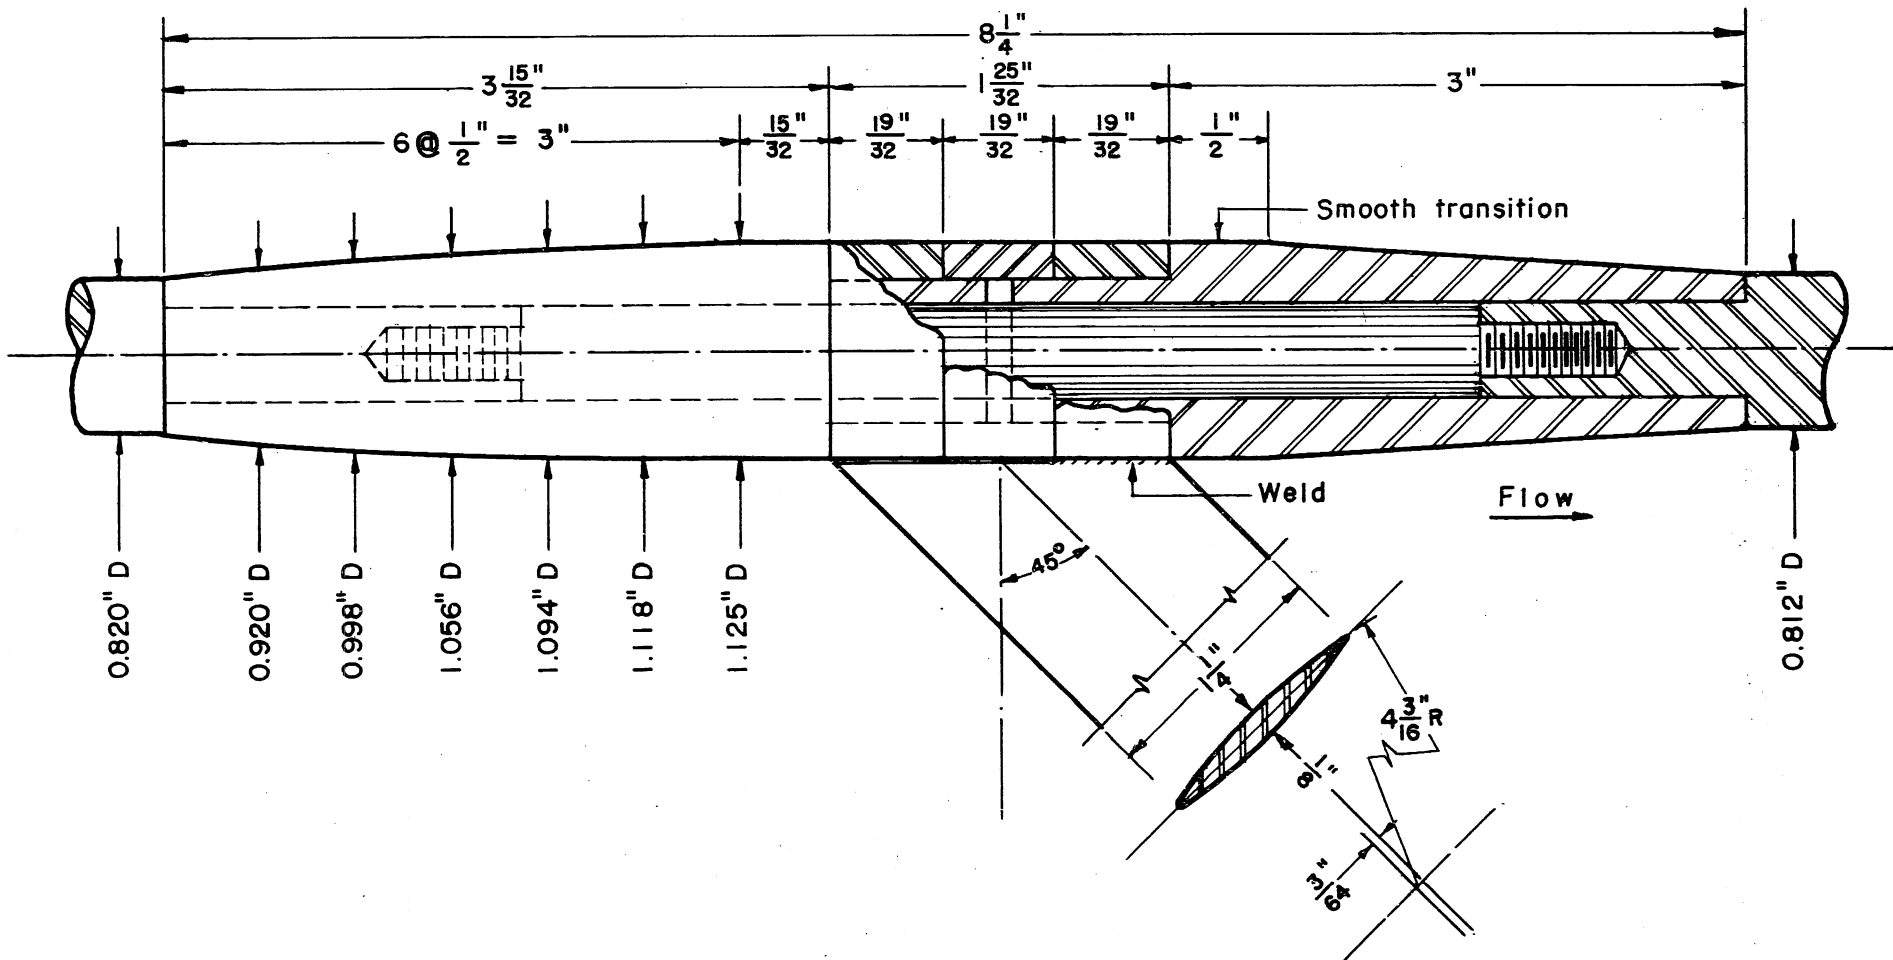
Detail of Supports for Diffuser Dynamometer Shaft
